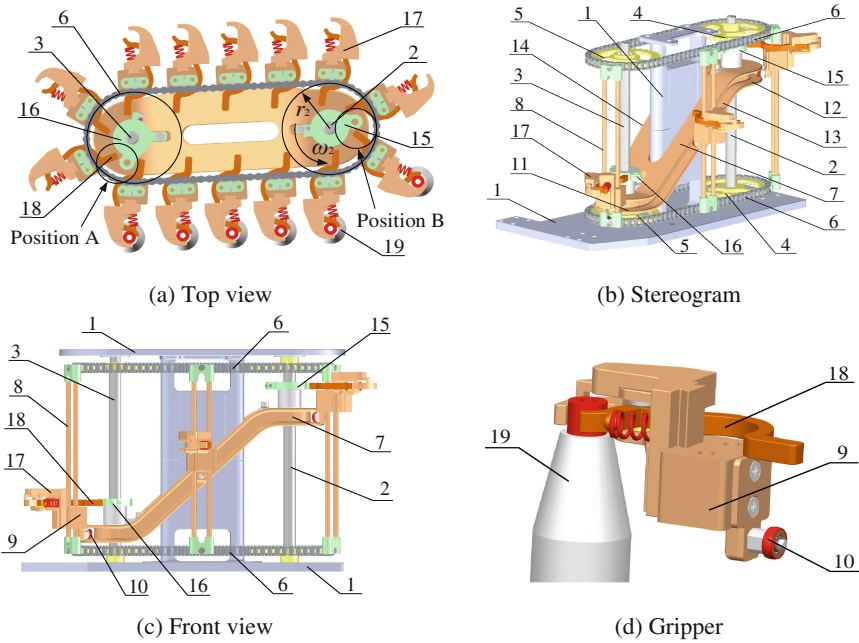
The doffing device of the SCMG robot. 1-base; 2-first driving shaft; 3-second driving shaft; 4-first chain wheel; 5-second chain wheel; 6-chain; 7-spatial cam; 8-vertical guide rail; 9-sliding block; 10-track roller; 11-lower horizontal segment of the spatial cam; 12-upper horizontal segment of the spatial cam; 13-upslope segment of the spatial cam; 14-downhill segment of the spatial cam; 15-first cam; 16-second cam; 17-gripper; 18-movable claw; 19-cop.
